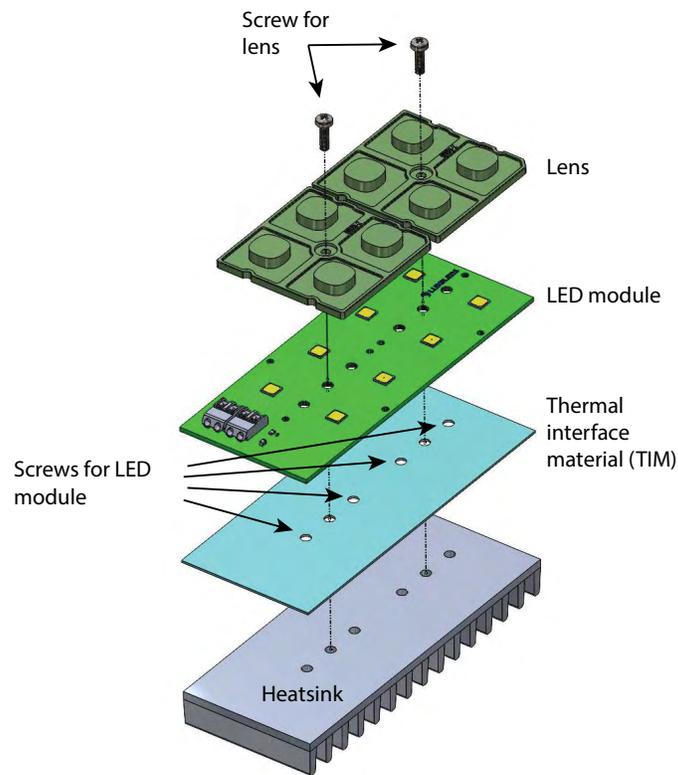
A typical LED module assembly with heatsink, TIM, lens and screws.
